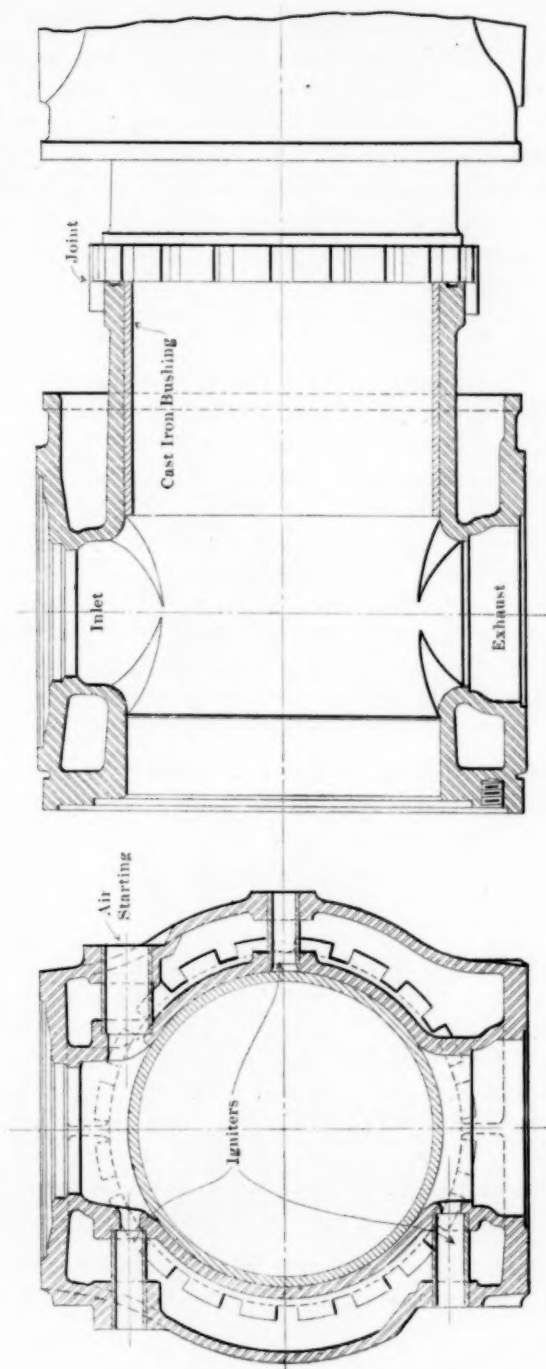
CAST-STEEL CYLINDER FOR 40-IN. BY 54-IN. GAS ENGINES
